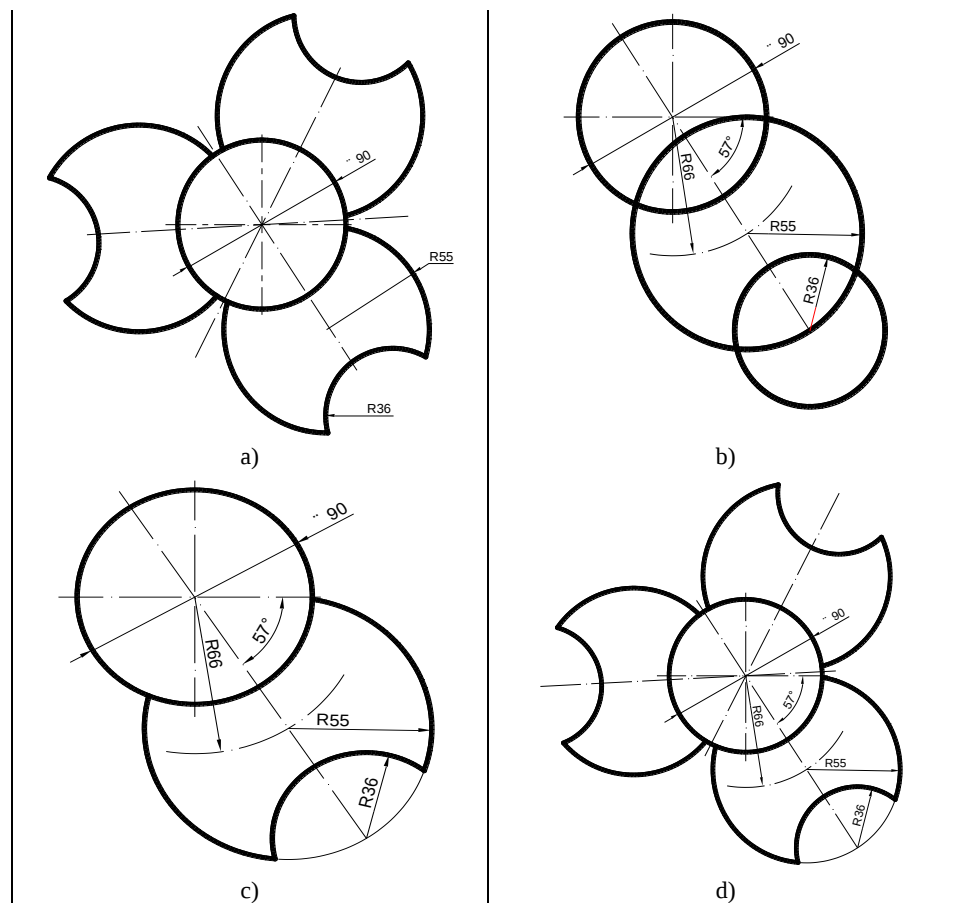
a) initially annotated dimensions; b, c) lecturer's explanation; d) final drawing
